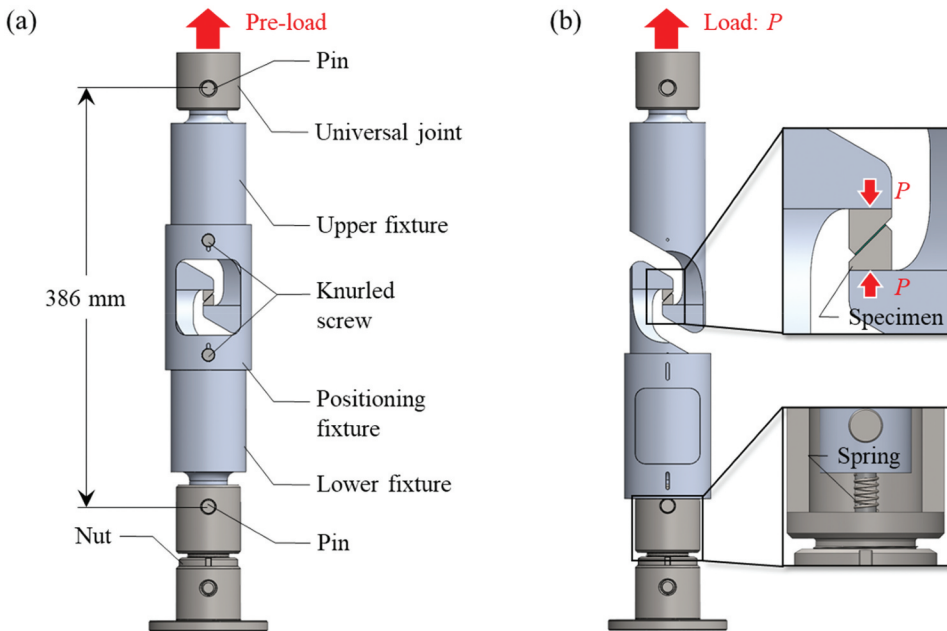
3D-CAD model of the fixture for compression – shear strength test in adhesive joints: (a) positioning and (b) test configurations.
